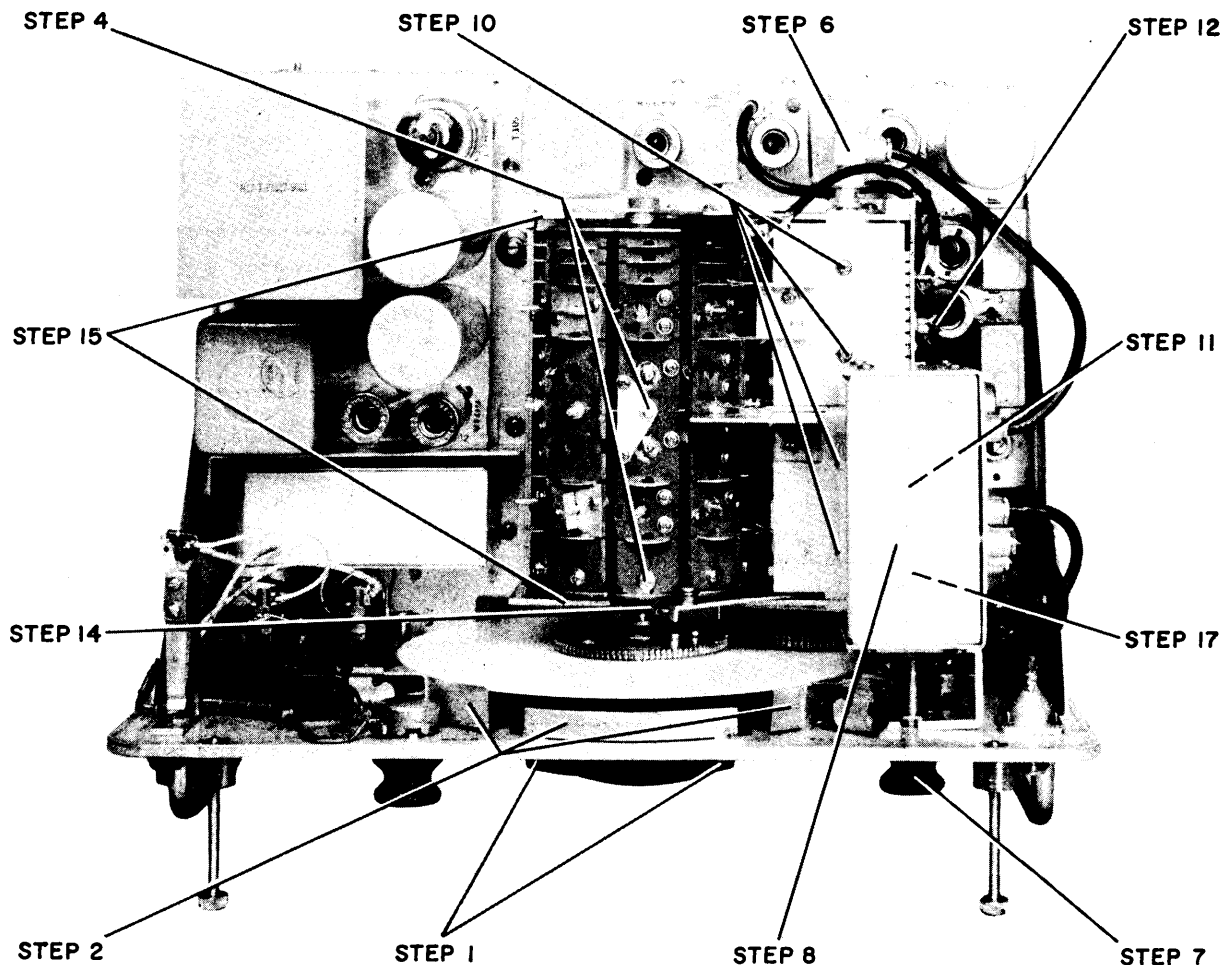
Location of Components Involved in the Removal of the R.F. Tuner Assembly
